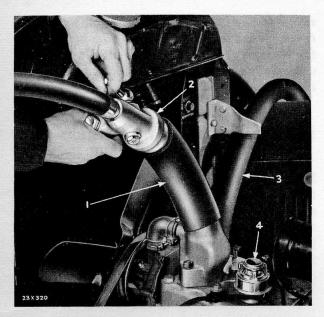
Flushing Cylinder Block with Flushing Gun (Typical View)
